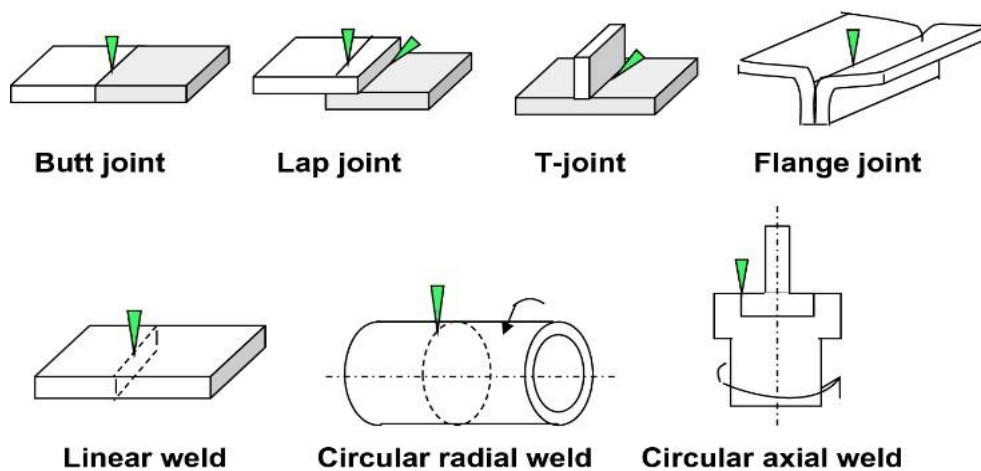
Laser Welded Joints (Source: Handbook of Laser Welding).
